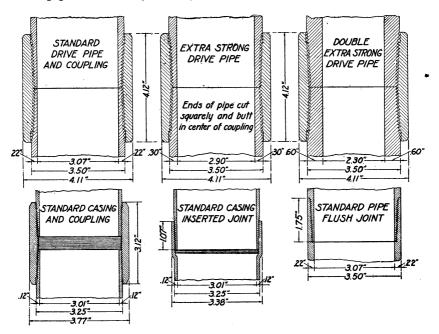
Sections of typical joints, 3-inch drive pipe and 3-inch well easing.
